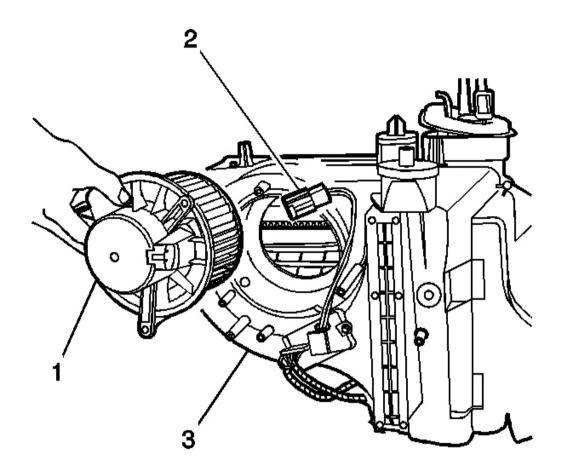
Blower Motor Assembly Courtesy of GENERAL MOTORS CORP.
